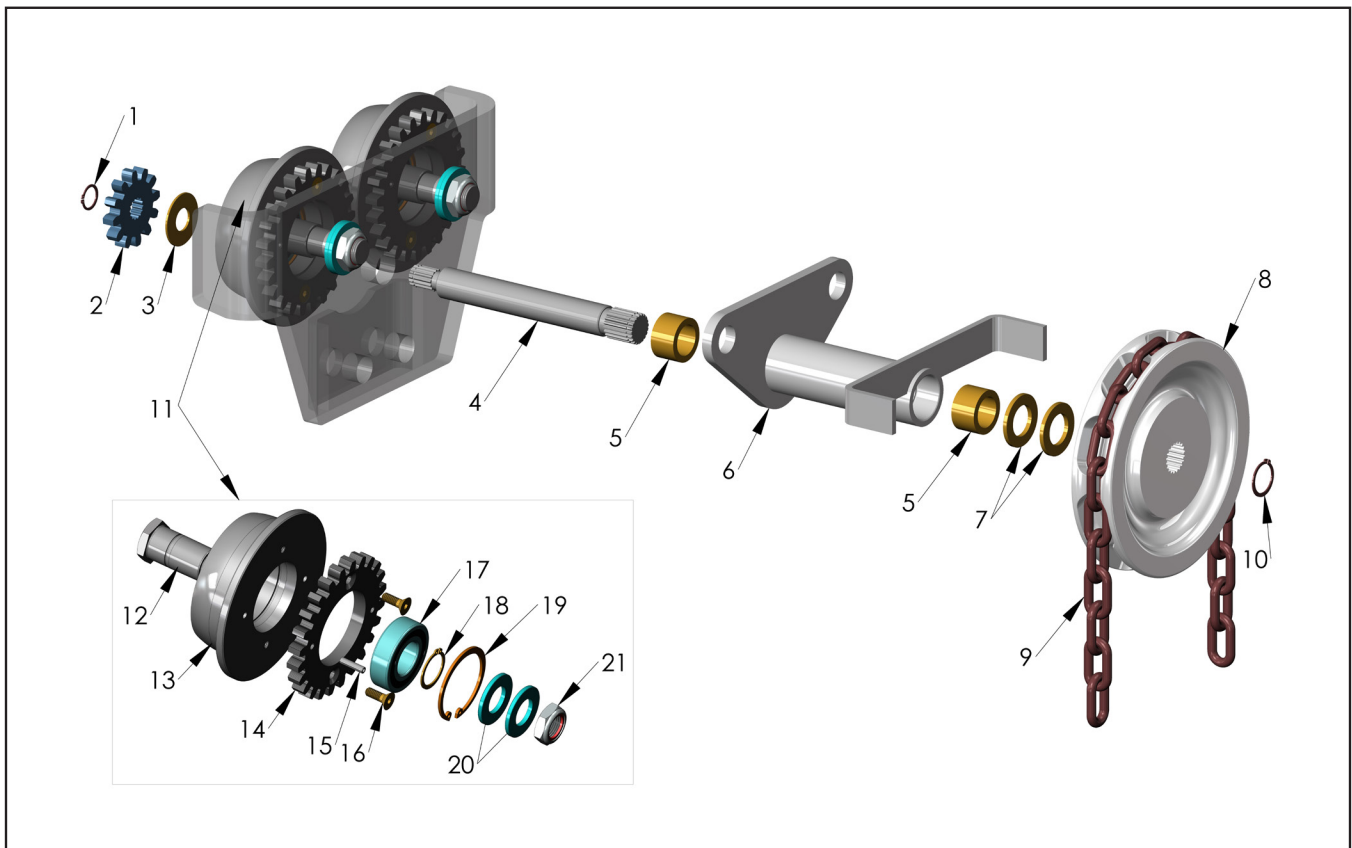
CTA GEARED TROLLEY ASSEMBLY
